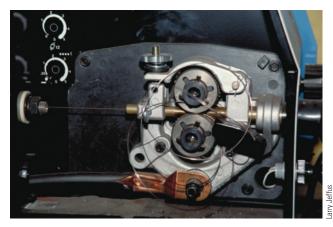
"Bird's nest" in the filler wire at the feed rollers.
